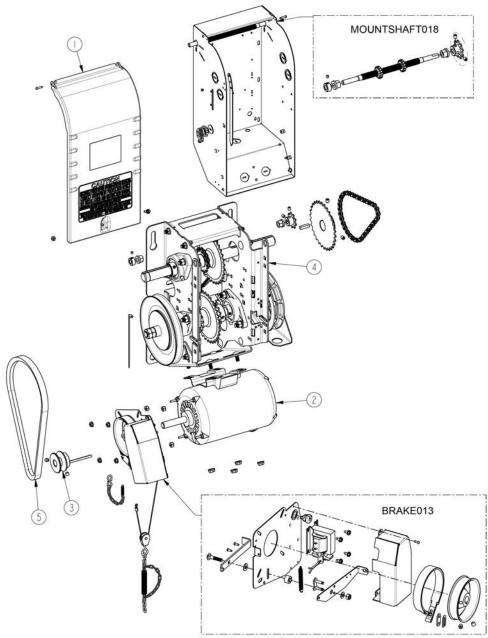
Rapido™ RSH General Mechanical Exploded View
